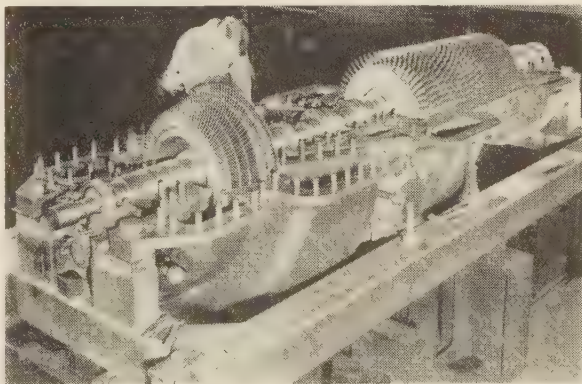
PARTIALLY ASSEMBLED GAS-TURBINE AXIAL-COMPRESSOR UNIT
